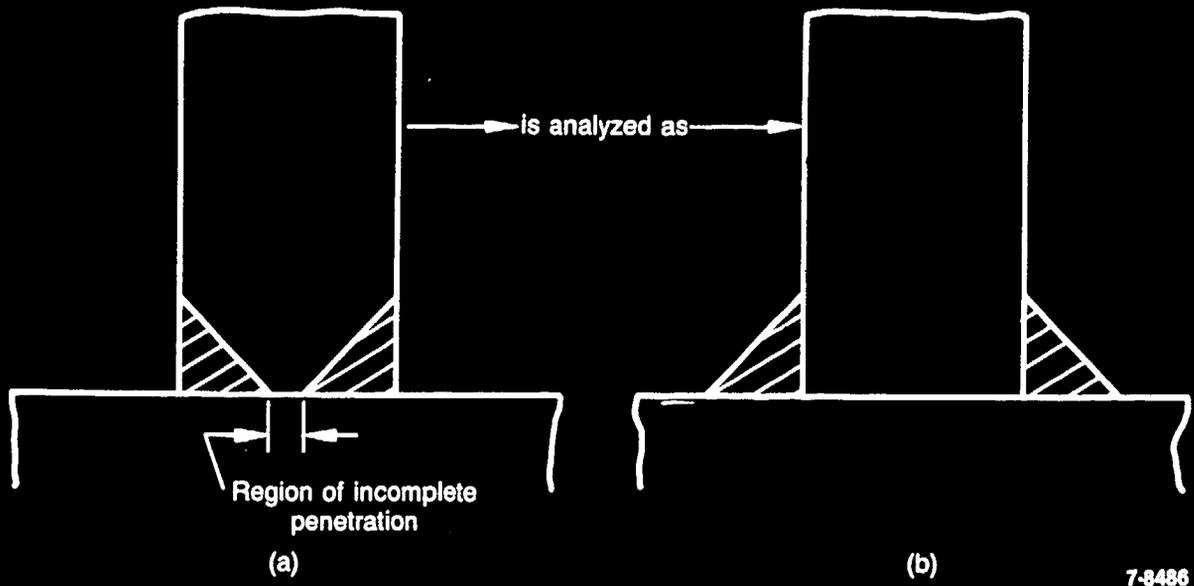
Weld with incomplete penetration showing (a) actual configuration of weld and (b) assumed configuration for purpose of analysis.
